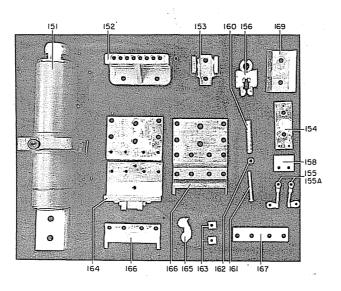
B Component Parts Rear Bushing Assembly (Ref. No. 150) Fig. 28
